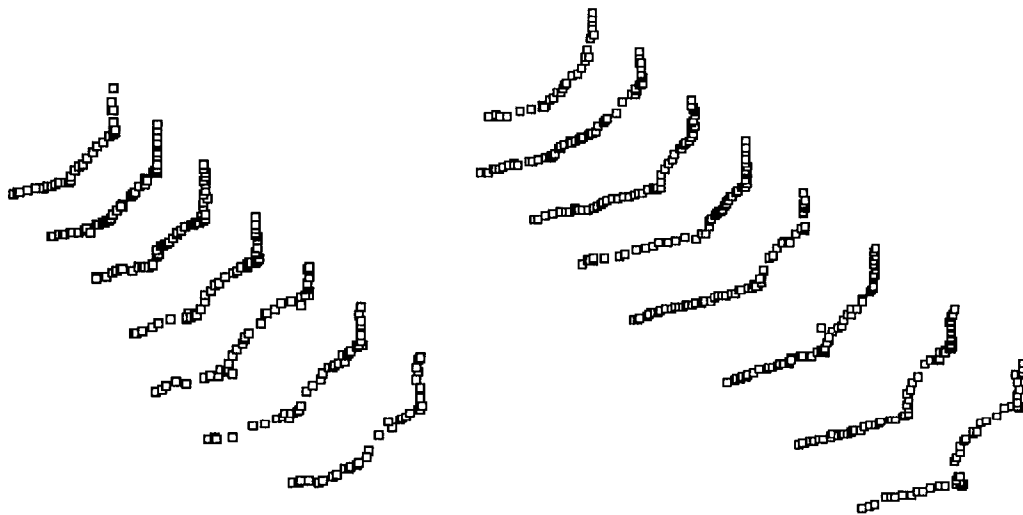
Examples of a number of locations on the weld profile, representing several cross sections of weld surface
